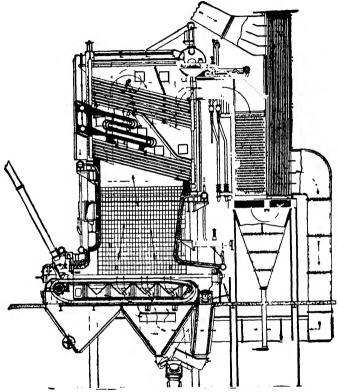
Babcock and Wilcox Cross Type Marine Boiler.
